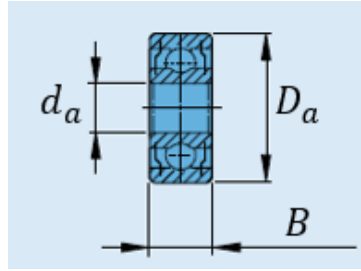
Bearing 6502.00103 drawing [18] - *Courtesy of Faulhaber.
